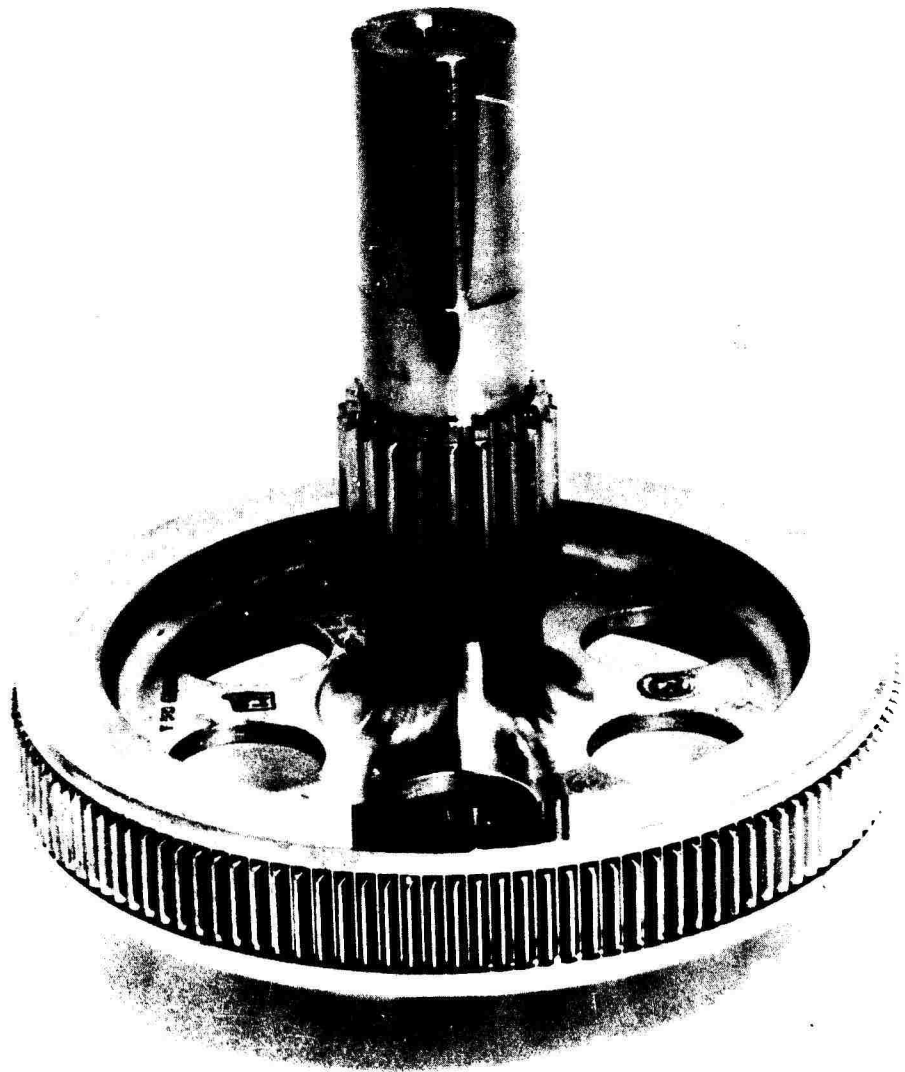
SECOND ROW ROLLER GEAR, X2Y2
